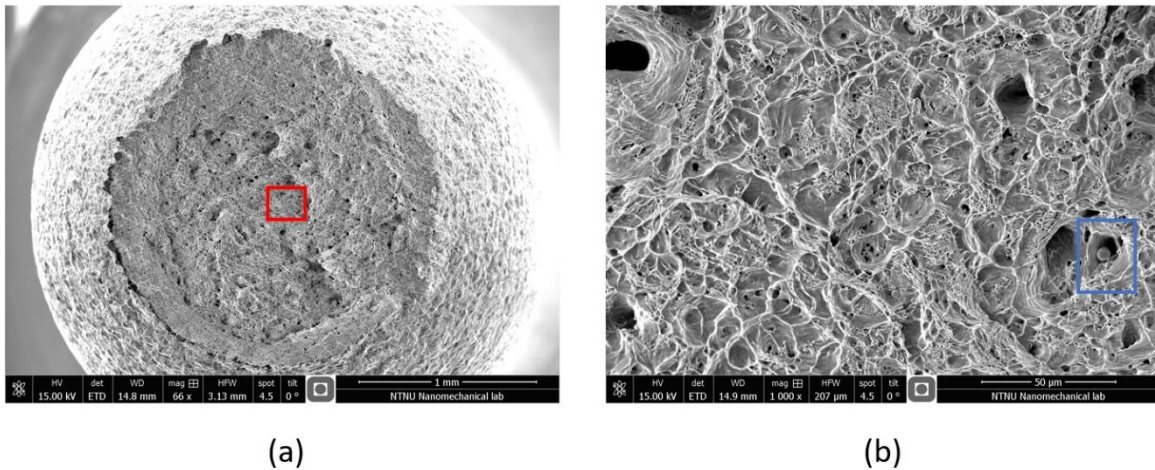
(a) Fracture surface at 66X (b) Close-up at 1000X of the area inside the red box marked in (a). The blue box shows a circular inclusion.
